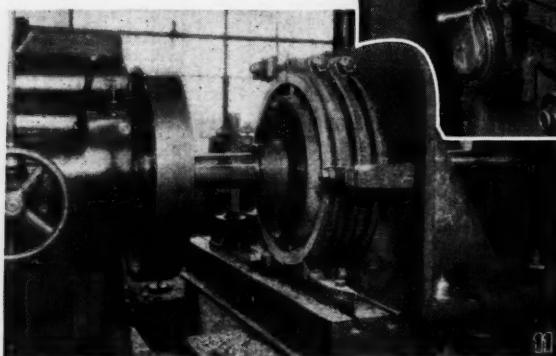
Machining air compressor crankshafts in a LeBlond Heavy Duty Crankshaft Lathe. Fig. 10—Crankshaft "pins" are ground to size in the Cincinnati Cylindrical Grinder. Fig. 11—Connecting rods for large power pumps are bored and faced on this horizontal boring machine.
